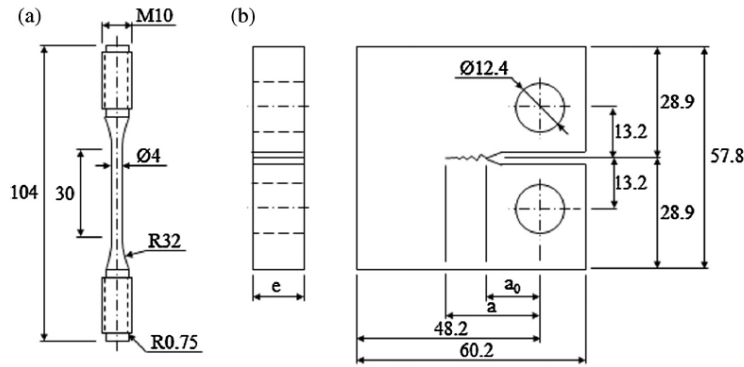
Geometry and dimensions of the specimens for: (a) Fatigue life; (b) Fatigue crack propagation.
